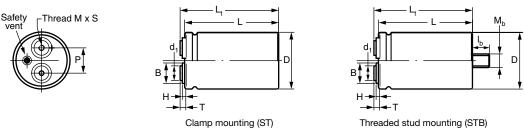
A - High current M5 and M6-13 mm disc: Screw Terminal (ST) and Screw Terminal Bolt nut (STB) For details refer to Table 1
